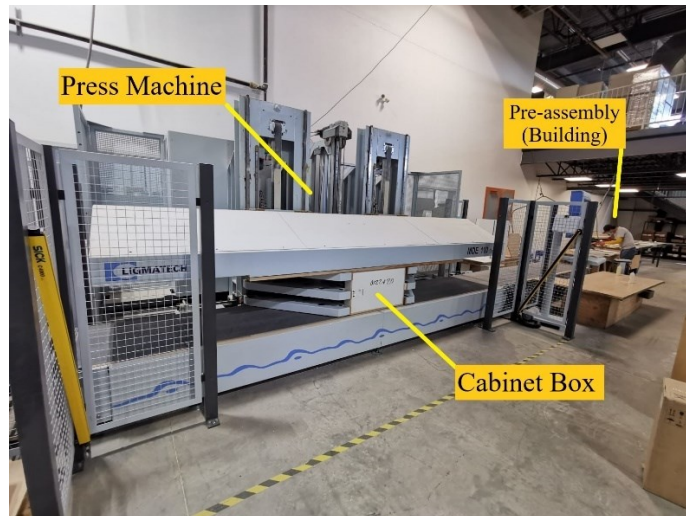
Pre-assembly line occupied with cabinets waiting to be built
